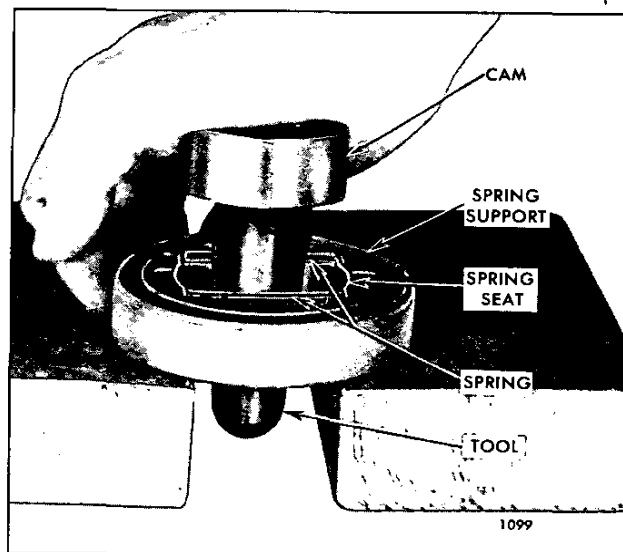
Inserting Cam in Blower Drive Support with Tool J 5209
